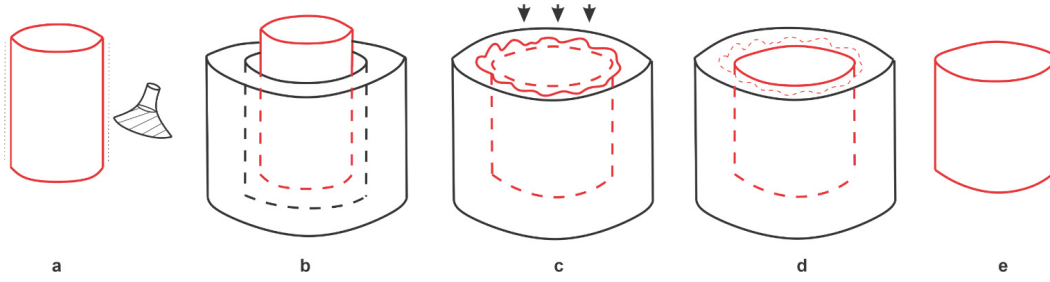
Cold forging process: (a: lubrication; b: insertion; c: stroke; d: flash; e: removing).
